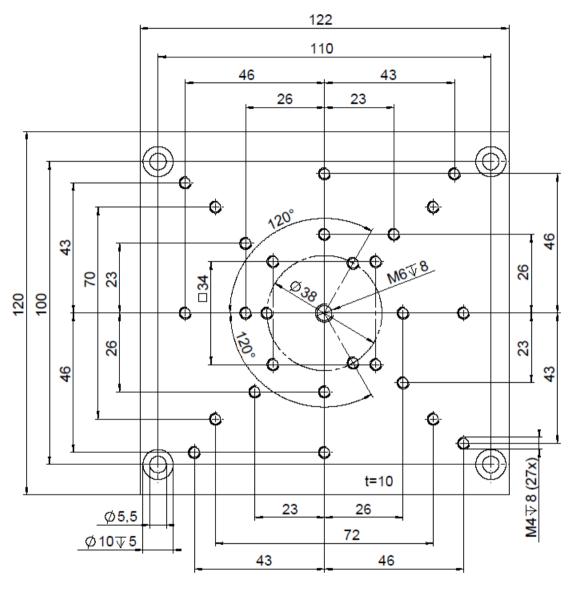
Dimensions of the M-413.AP1 mounting adapter
